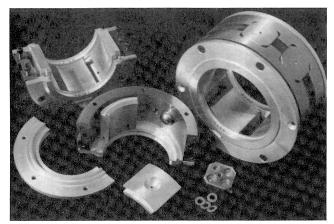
Radial Bearing with Spherical Seat Supports to the Retainer.
